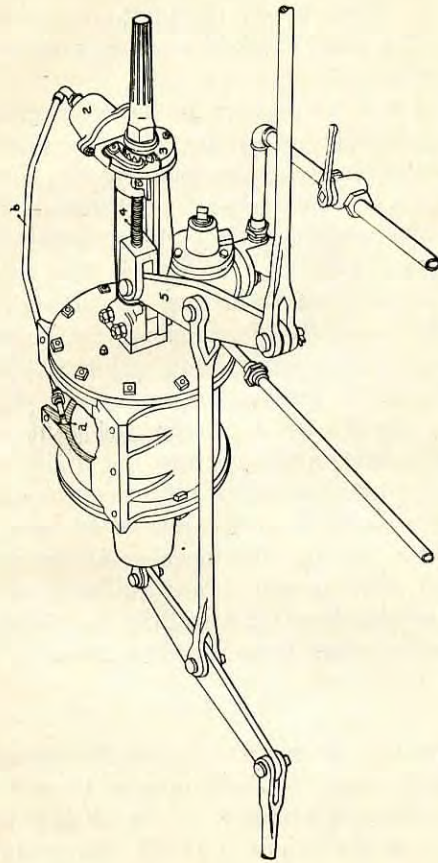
Automatic Slack Adjuster Attached to Brake Cylinder.
